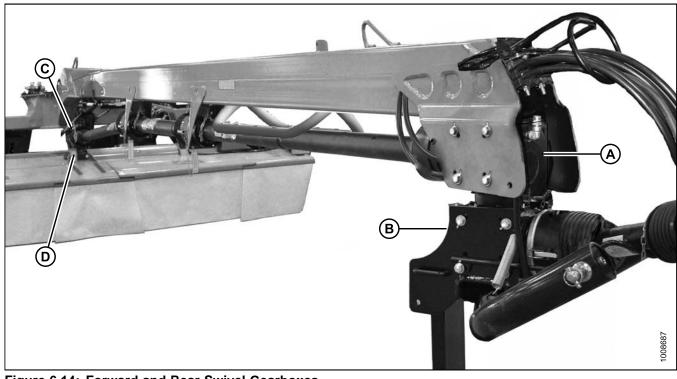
Forward and Rear Swivel GearboxesA - Upper Forward GearboxB - Lower Forward Gearbox
